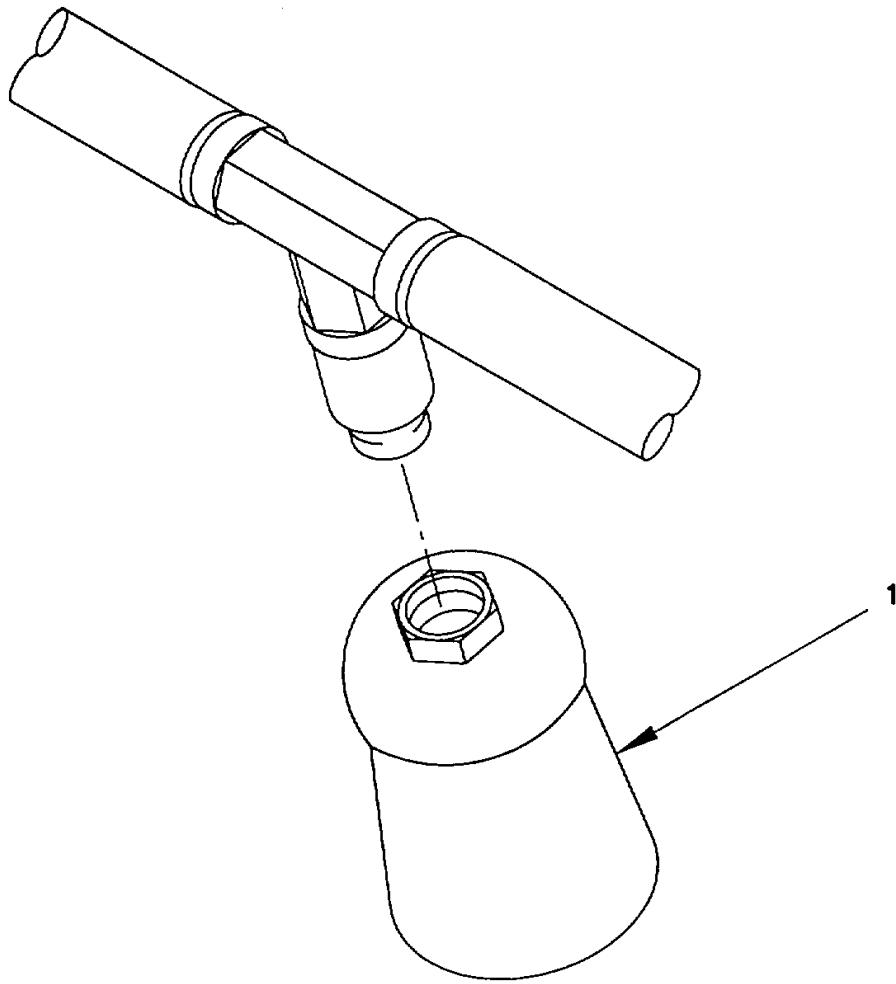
Discharge Nozzle, Fire Suppression System, Remove/Install.
